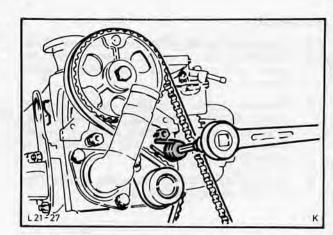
Slacken toothed belt tensioner, using Special Tool 21–012
